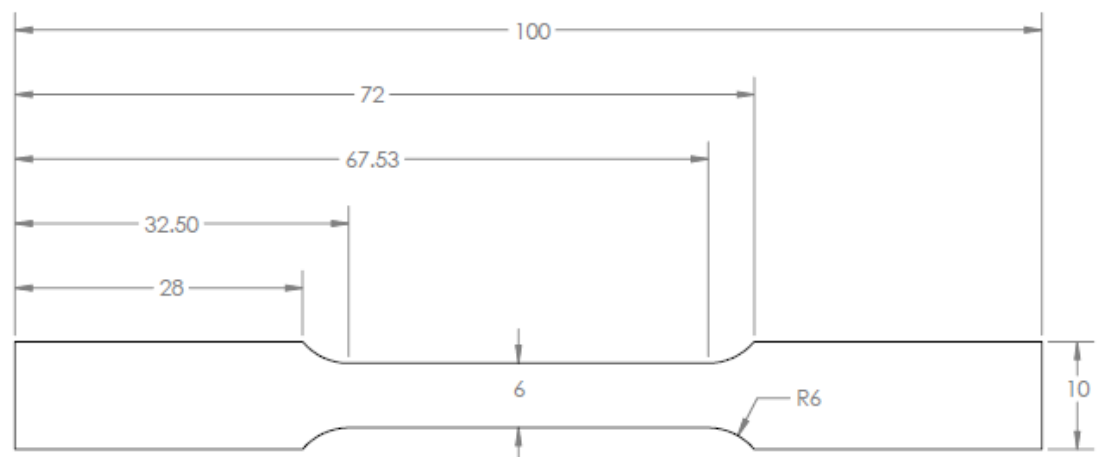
Dimensioned Tensile testing specimen according to the ASTM E8M-04 standards without weld
